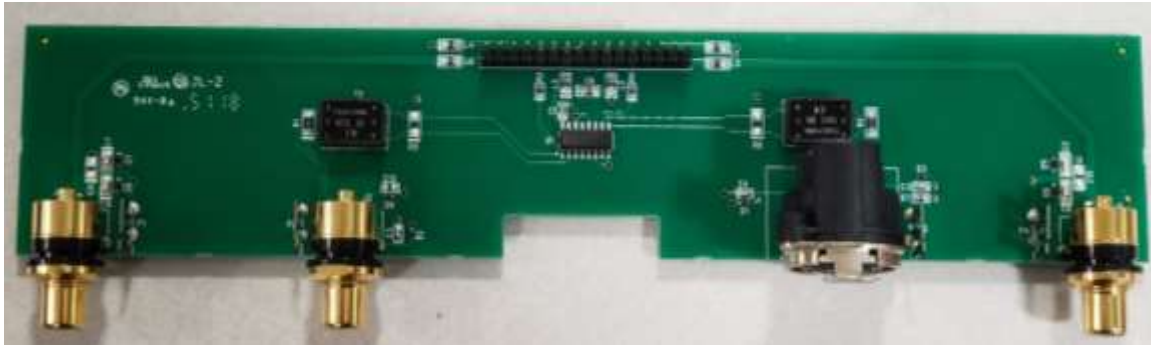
Photo of No5802 Digital Expansion PCB (Top View)
